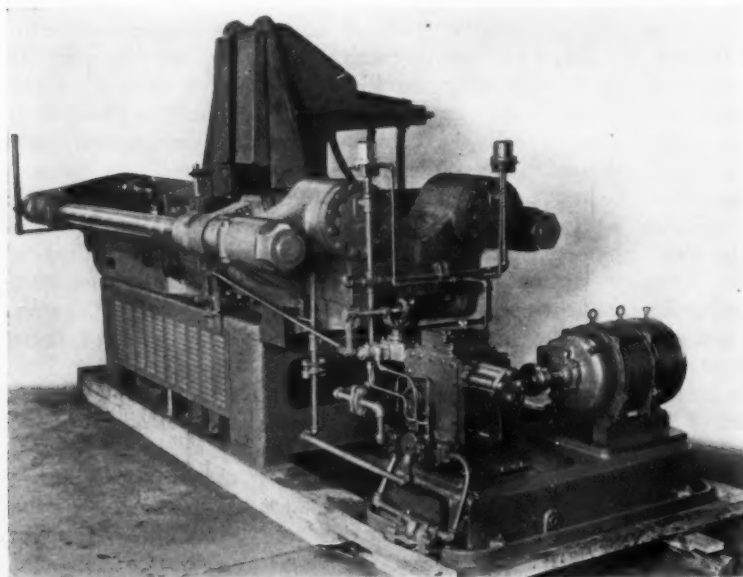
750-KVA ELECTRIC BUTT WELDER WITH HYDRAULIC TABLE DRIVE
